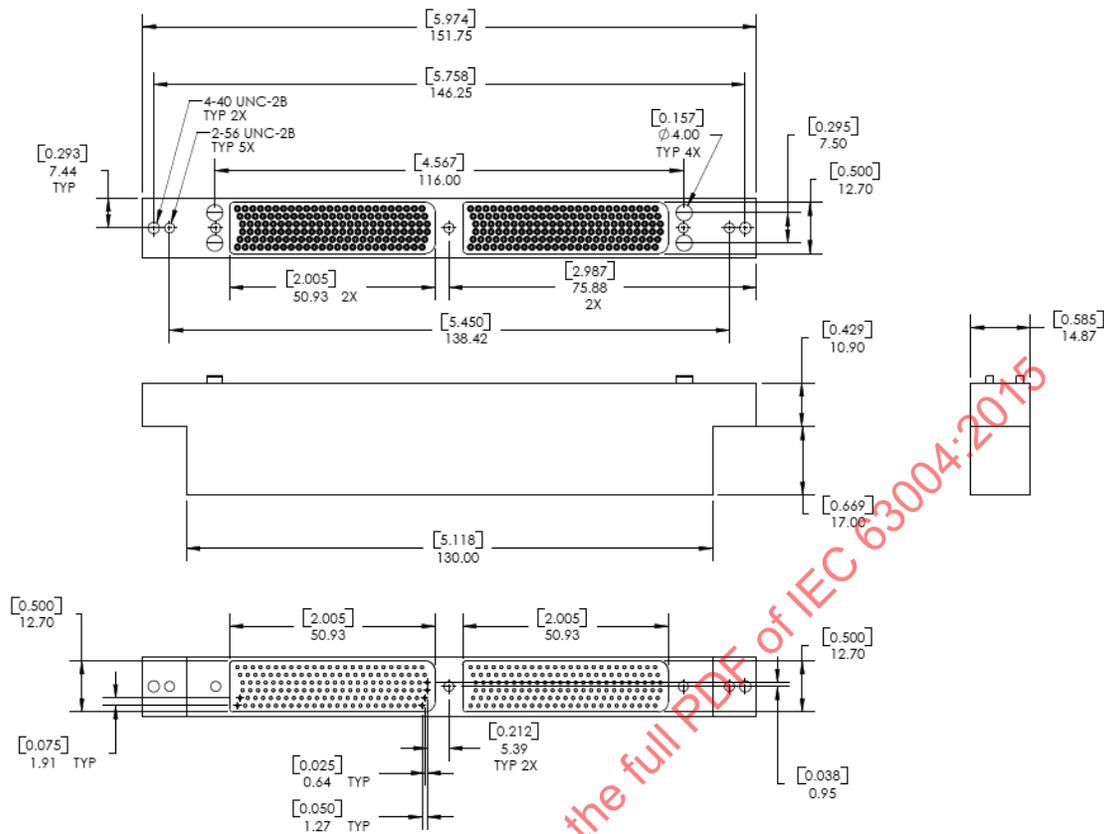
High-speed signal module receiver receptacle connector assembly dimensional specifications
